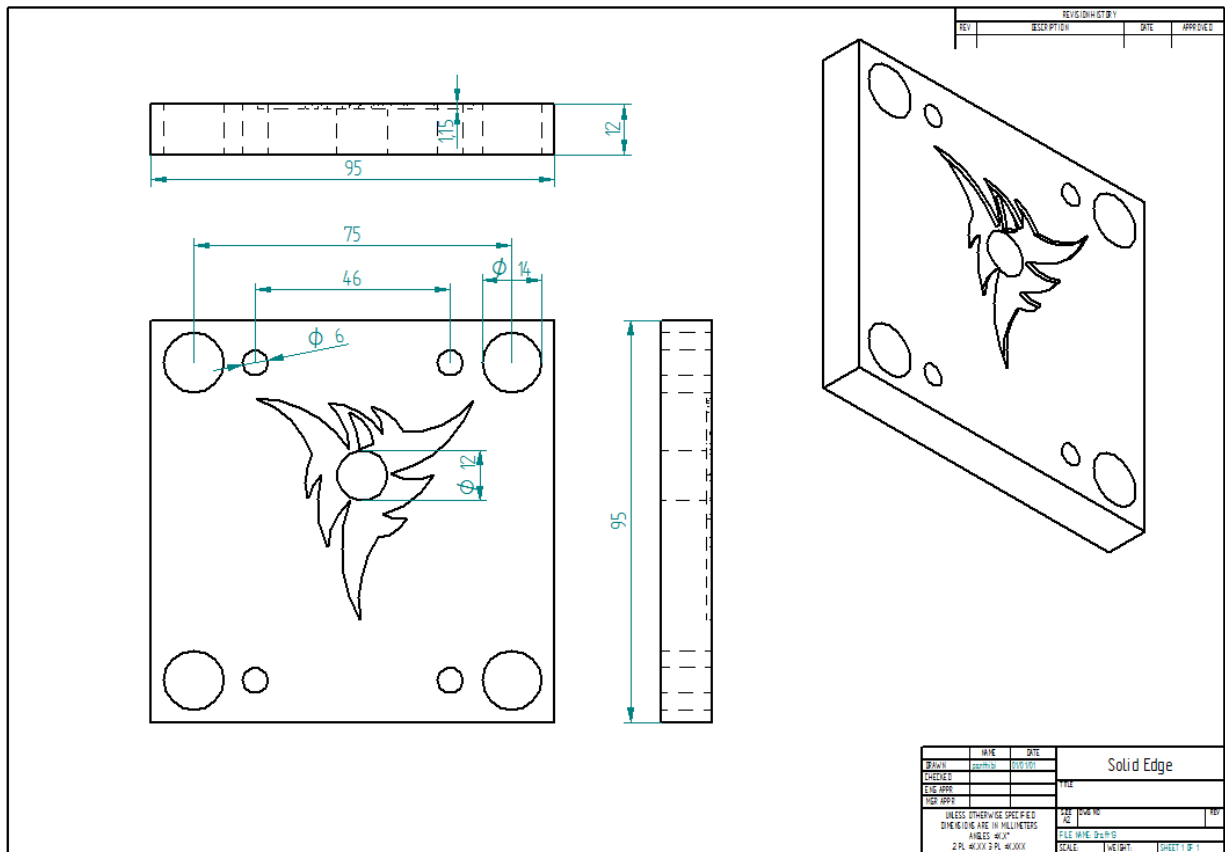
Technical 2D drawing of double cavity Mould (Injection part) [Drawn by Author in Solid Edge]
